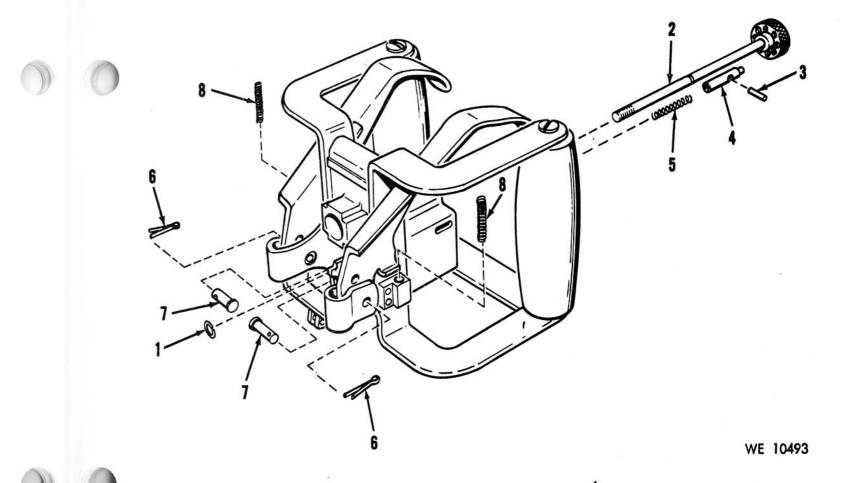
Grip and trigger Assembly-Partially Exploded View.
